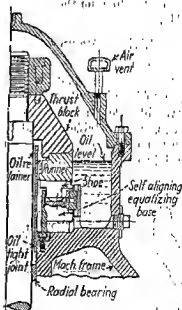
Half Section of Mounting for Vertical Thrust Bearing.
